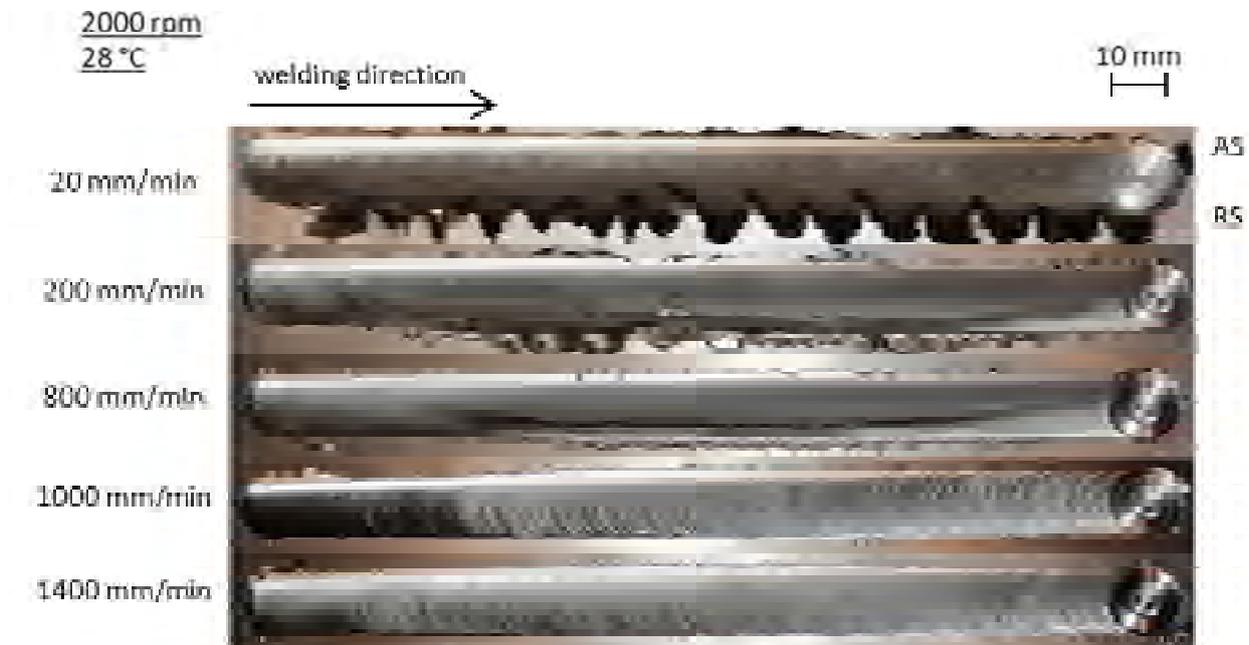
surface appearance of FSW of extruded AZ31 (bead on plate weld) for different welding speeds at constant rotational speed and a starting temperature of 28 °C.
